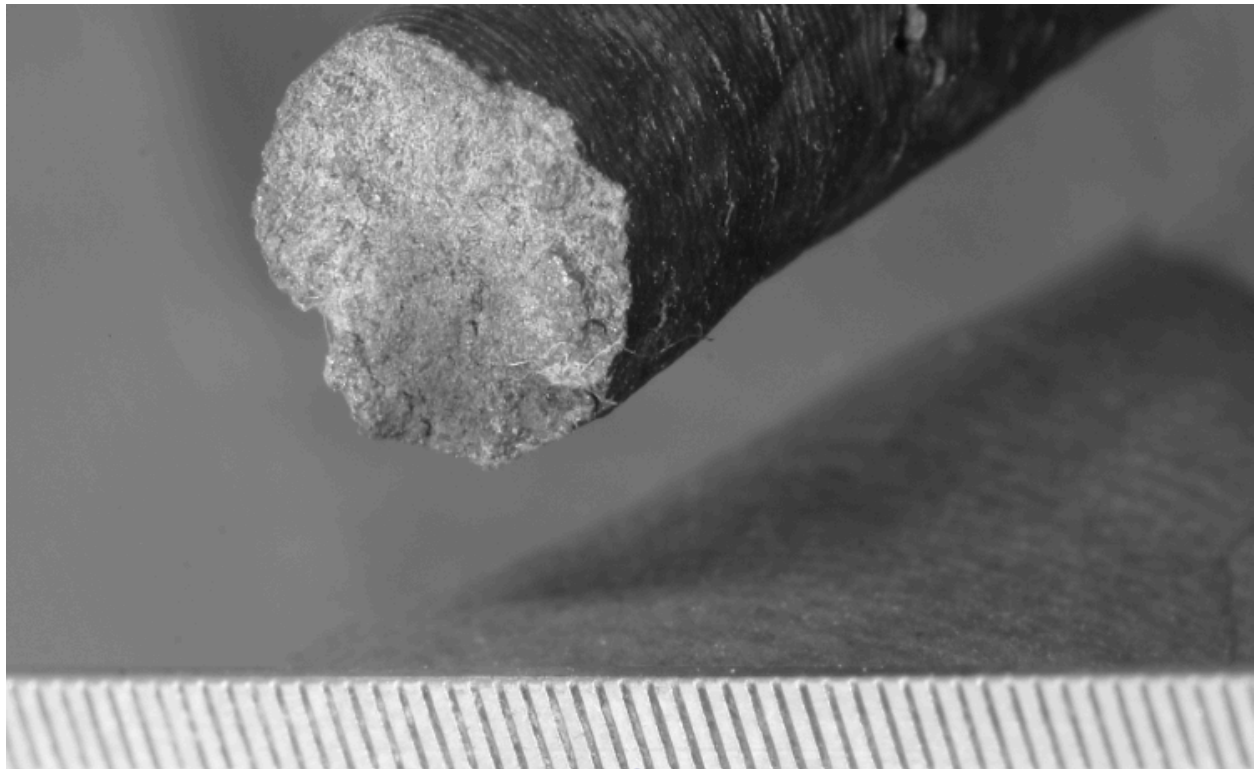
Macro-photographic image of the fracture surface of the specimen S5 (set 128) halve demonstrated on the left-hand side in figure 34.
